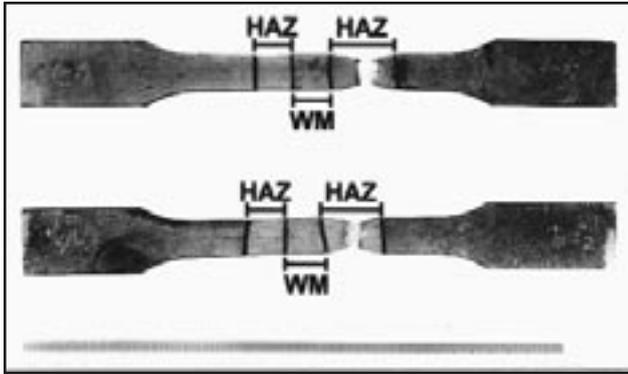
Typical fracture appearance of tensile specimens broken in the weld HAZ.
